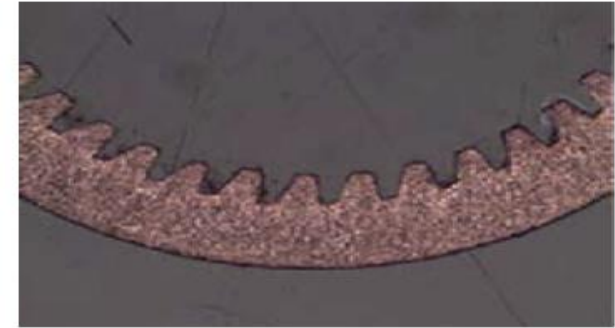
Enlarged view of cross-sectional shape of grooved tube.
